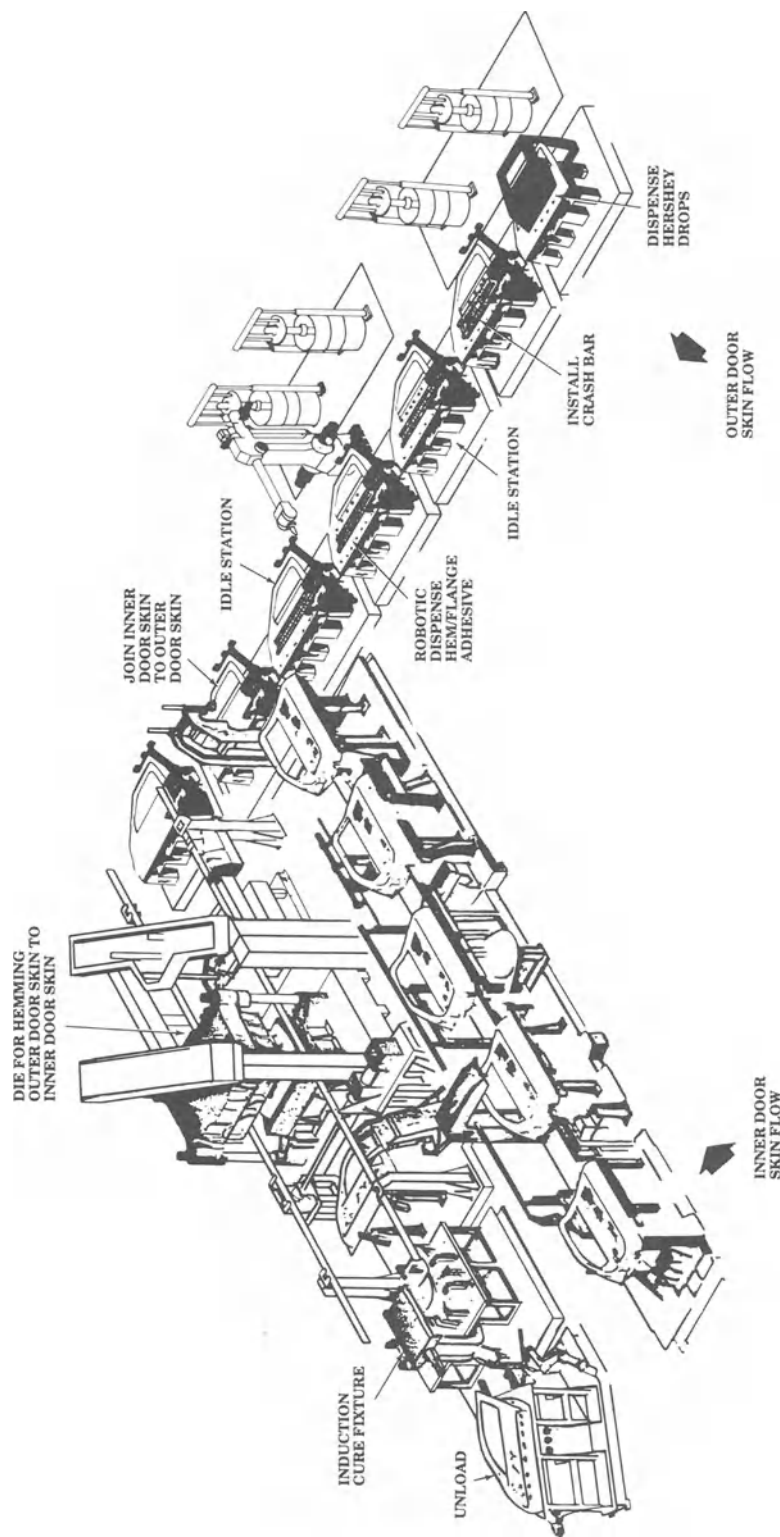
Typical door assembly line at a stamping plant or in the body shop of a final assembly plant.
